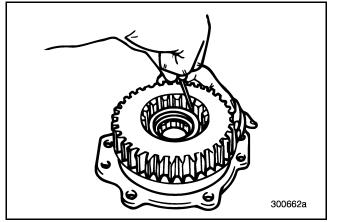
Installing Main Drive Pinion Gear and Spiral Snap Ring
